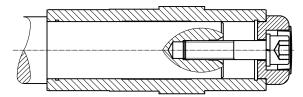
Gear unit mounted to shaft with a shoulder using the fastening element
